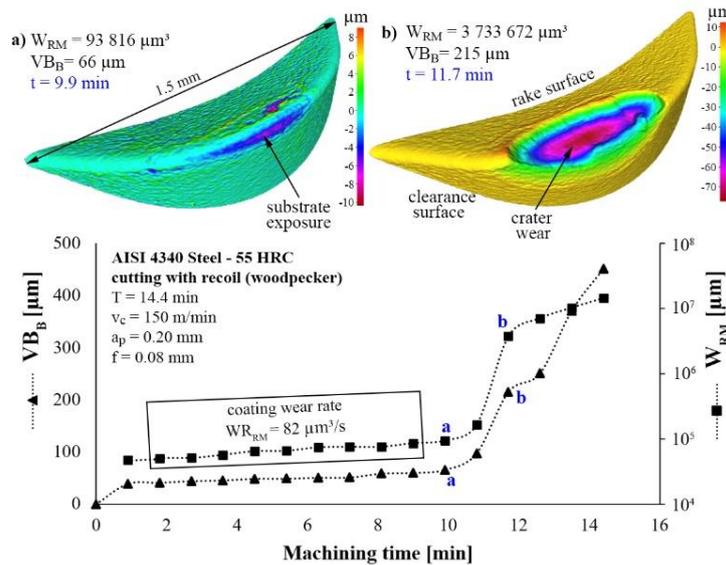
Evolution wear of the coated cemented carbide tool wear for woodpecker machining strategy.
